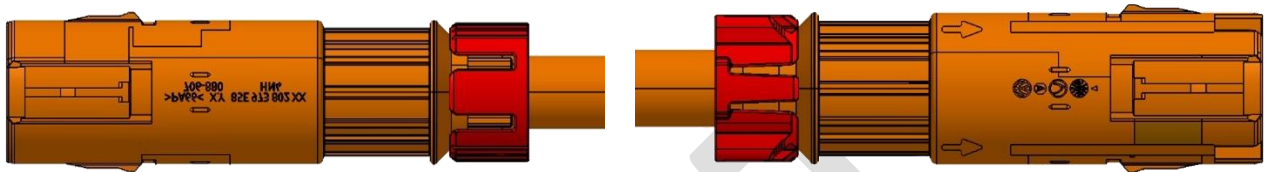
Control dimension of the ASSY Male-Contact-holder with ASSY Shield-sleeve
